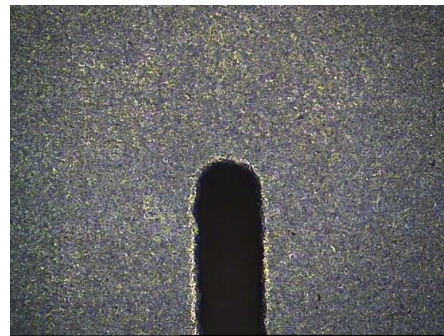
Rib detail on the MS02 moulding block manufactured by microMilling
